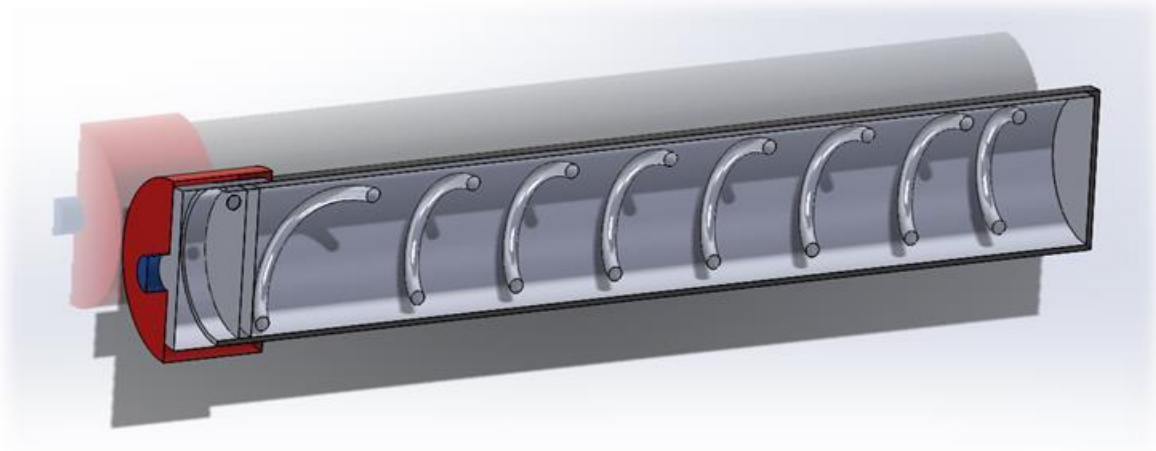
3D rendering of cutaway view showing damping cylinder, spring and piston
